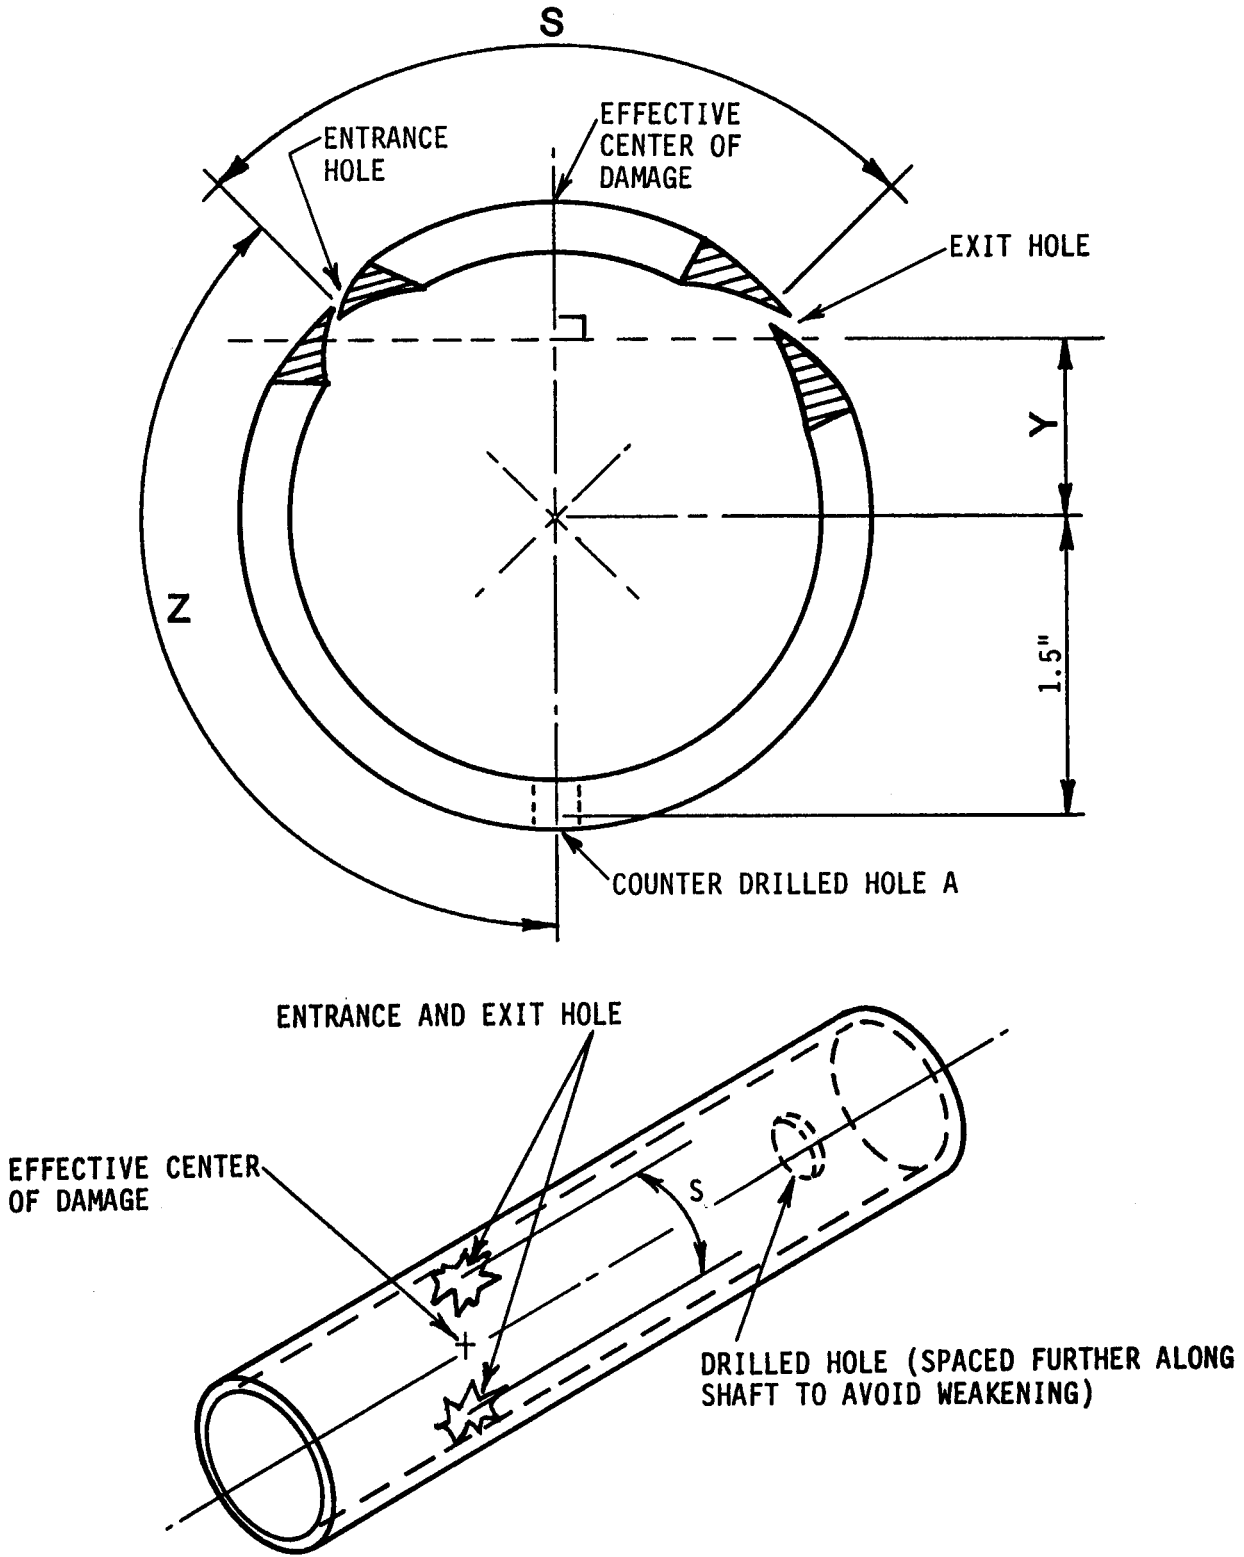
Balance Restoring Repair for Damage Not Passing Through the Center of Shaft
